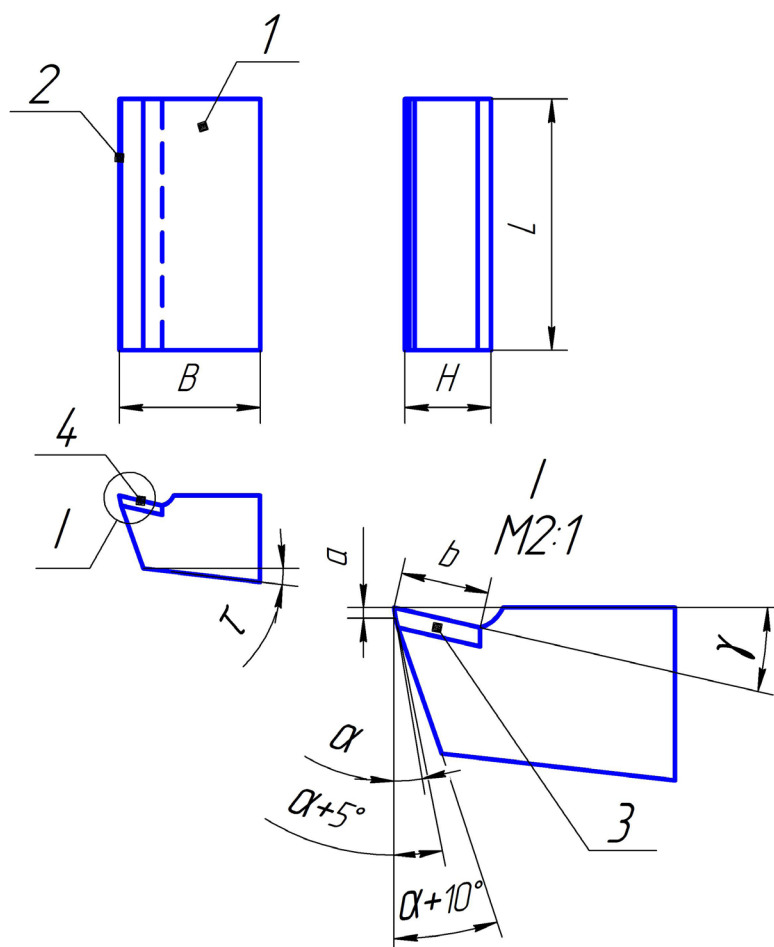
Design and geometric parameters of a rotary through-hole reciprocating cutter
